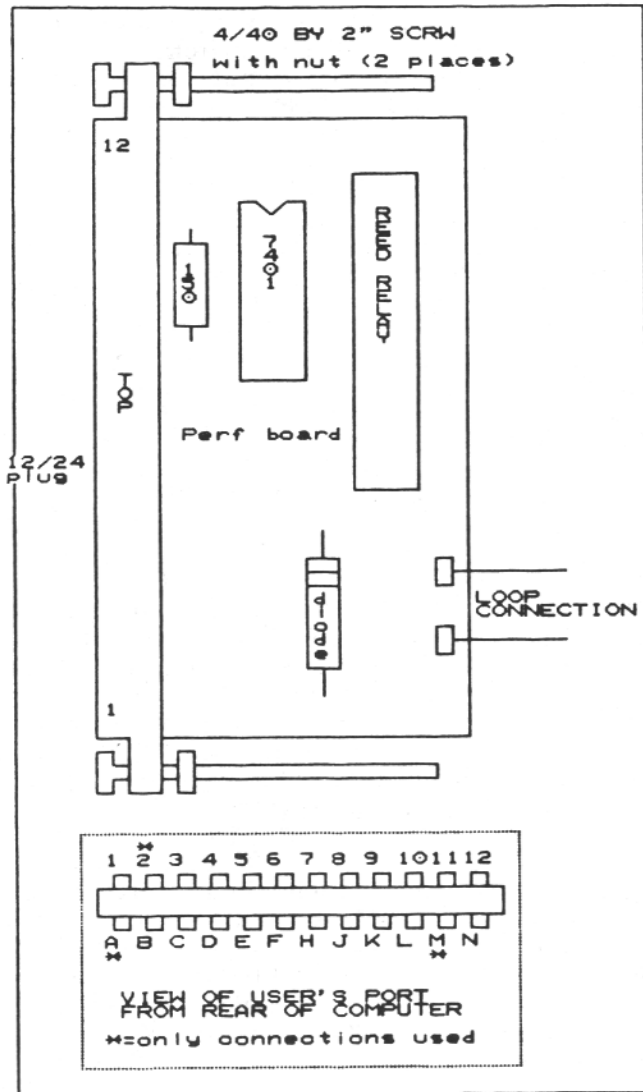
BAUDOT PRINTER LOOP ADAPTER LAYOUT VIEWS
